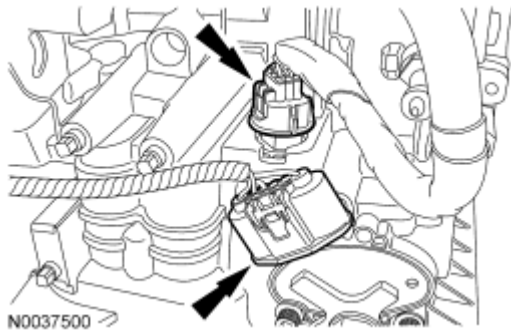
Locating Transmission Range (TR) Sensor And Primary Control Solenoid Electrical Connectors
